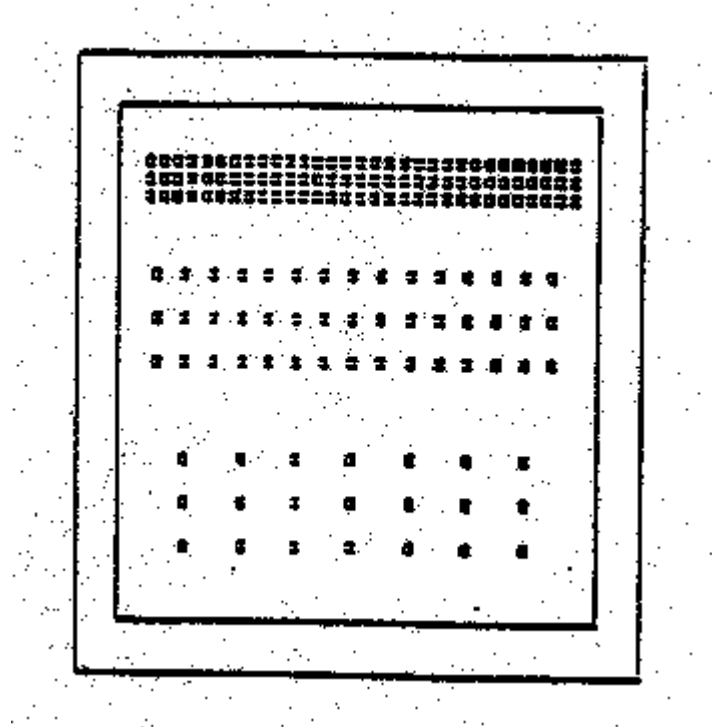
Baseline for spot weld panel: 2424-T3 alclad, 0.080-inch.
